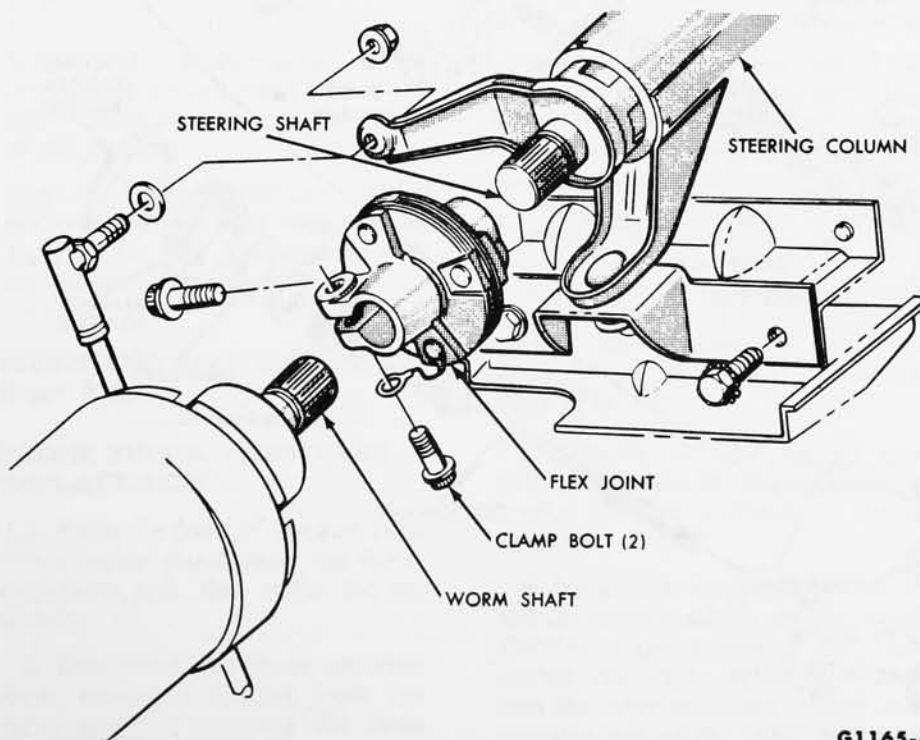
Steering Column and Shaft-to-Steering Gear Connections
